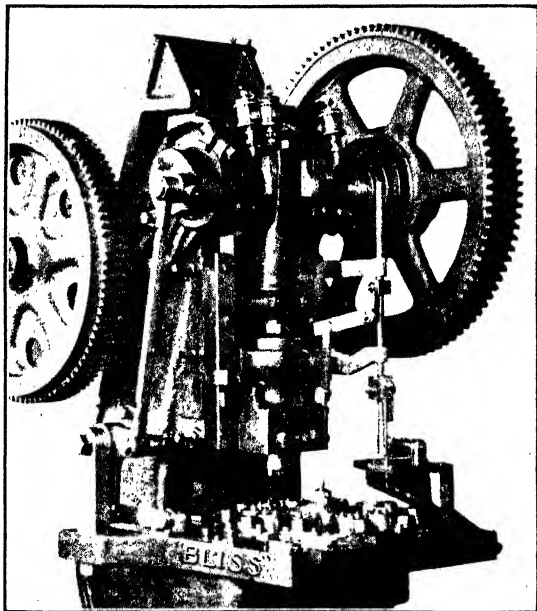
The press and feed used to assemble the vibrator spring and bridge piece, Fig. 200*d*, extruding and riveting complete.
